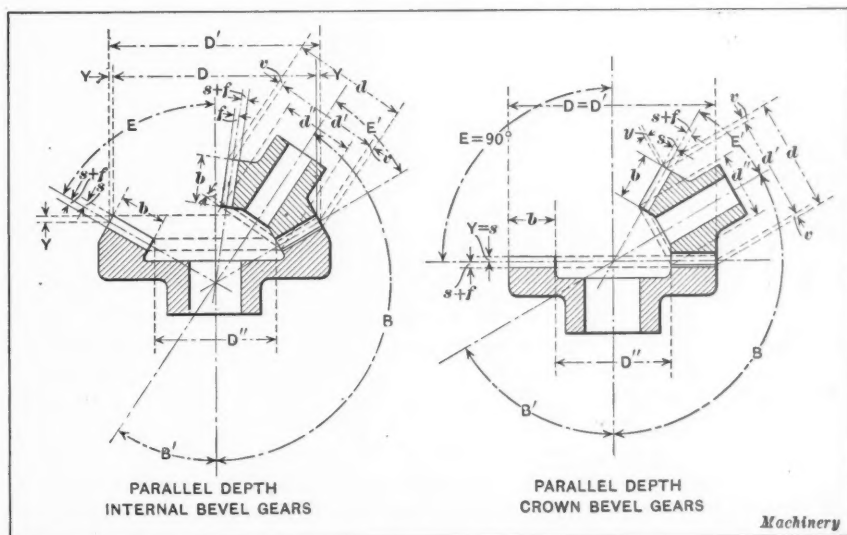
Bevel Gearing with Parallel Depth Teeth
